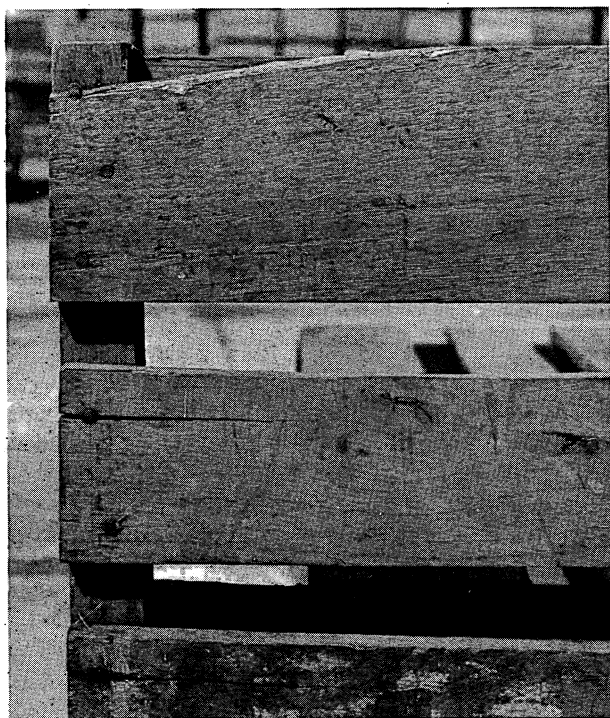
Wedge breakout at leading (outside) corner of top edgeboard.
